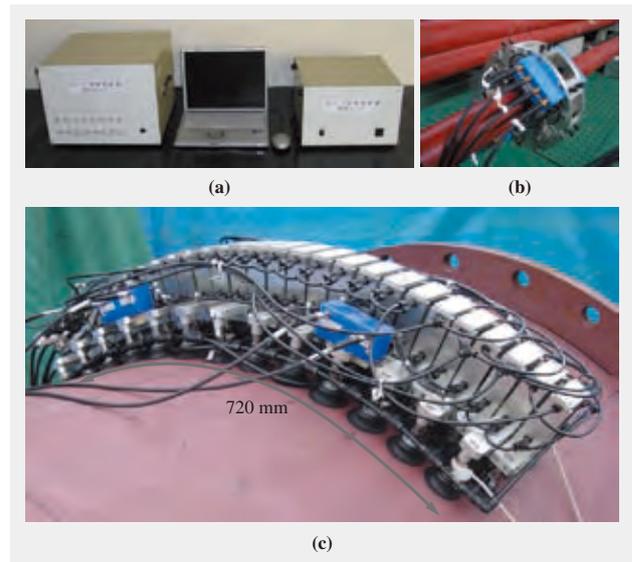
Portable Guided Wave Inspection System. Guided wave transceiver unit (a), probe for 50 A pipes (b), and partially attached probe for large-diameter pipes (c) are shown.
